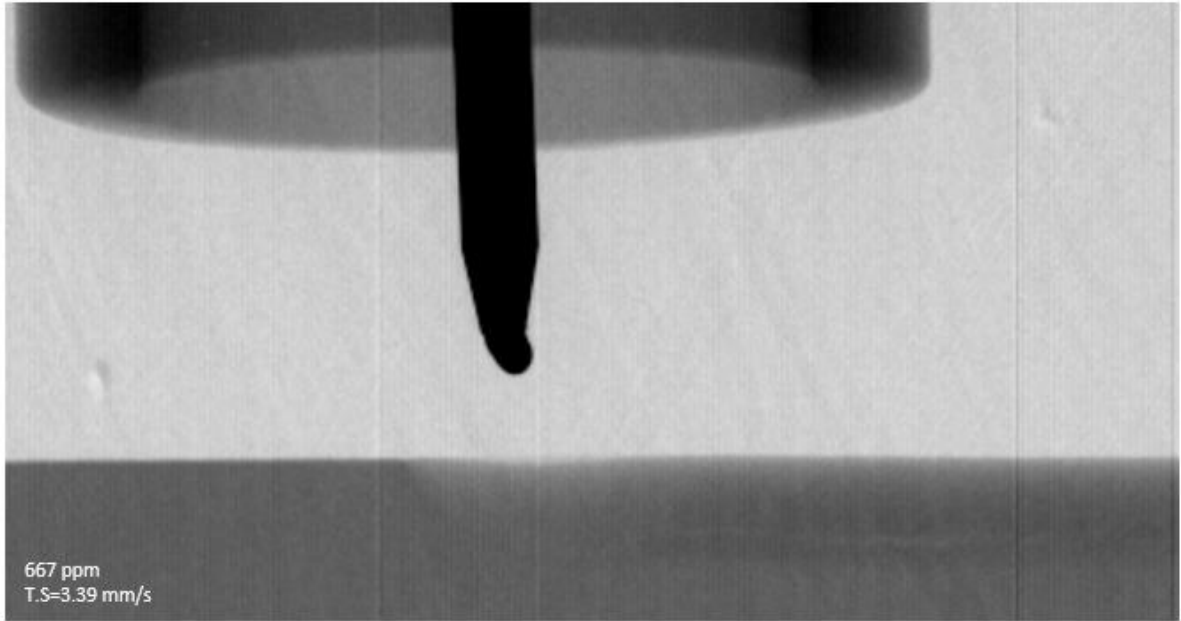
Alloy 1100 welded using 667 ppm of shielding gas hydrogen at 3.39 mm/s.
